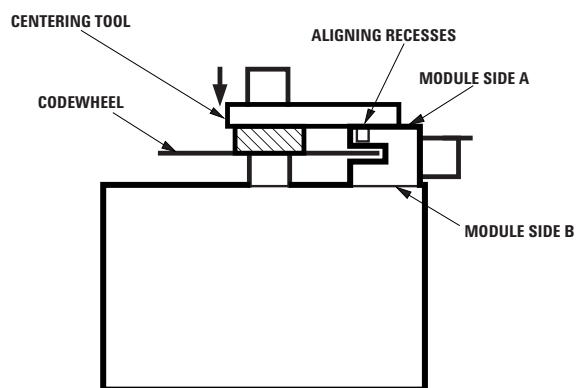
Alignment Tool is Placed over Shaft and onto Codewheel Hub. Alignment Tool Pins Mate with Aligning Recesses on Module.
